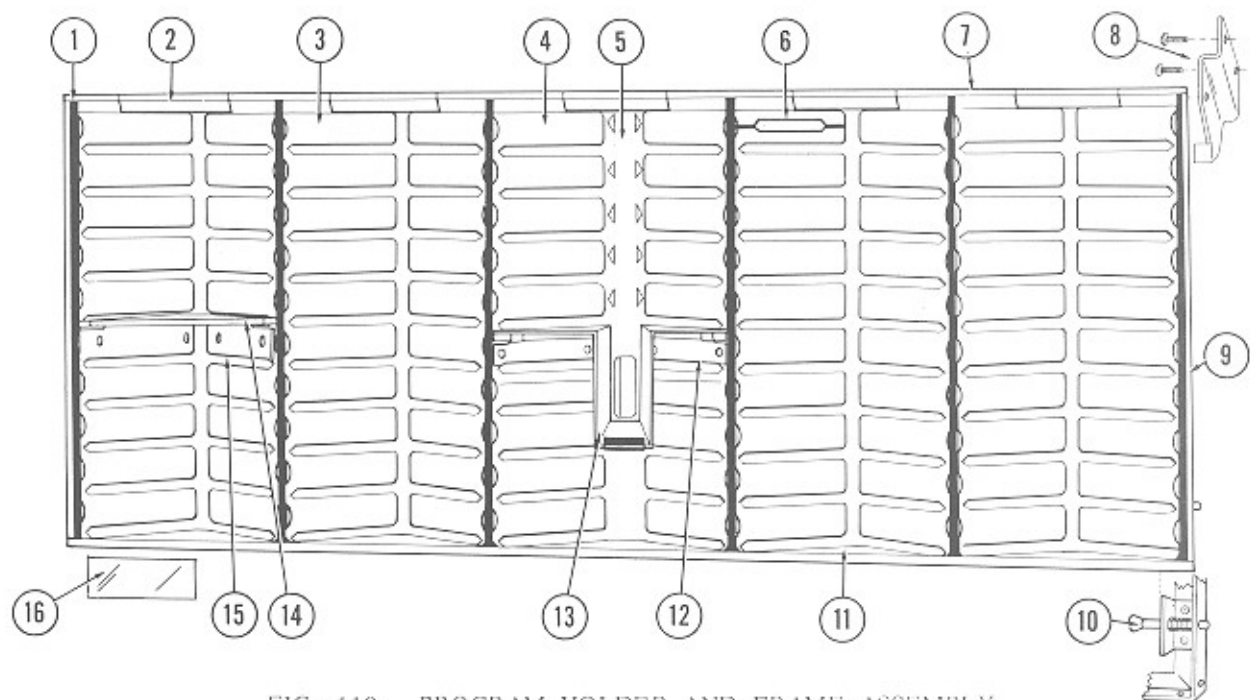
PROGRAM HOLDER AND FRAME ASSEMBLY
